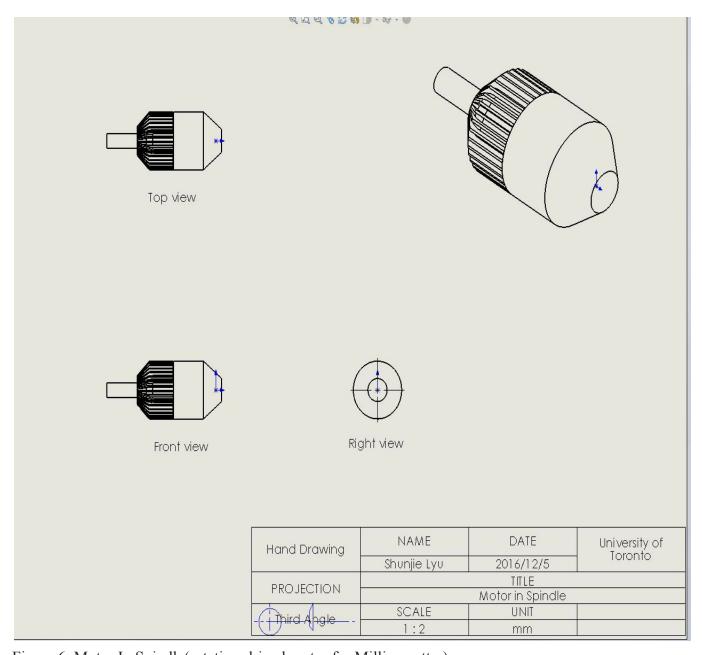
Motor In Spindle(rotation-drived motor for Milling cutter)
